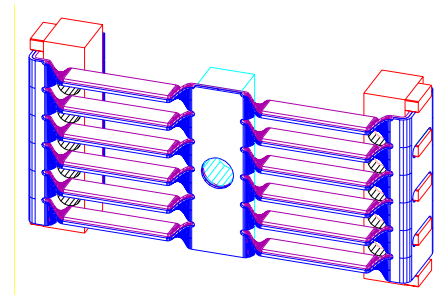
Stub Key and Back View of a Typical Outboard Module
